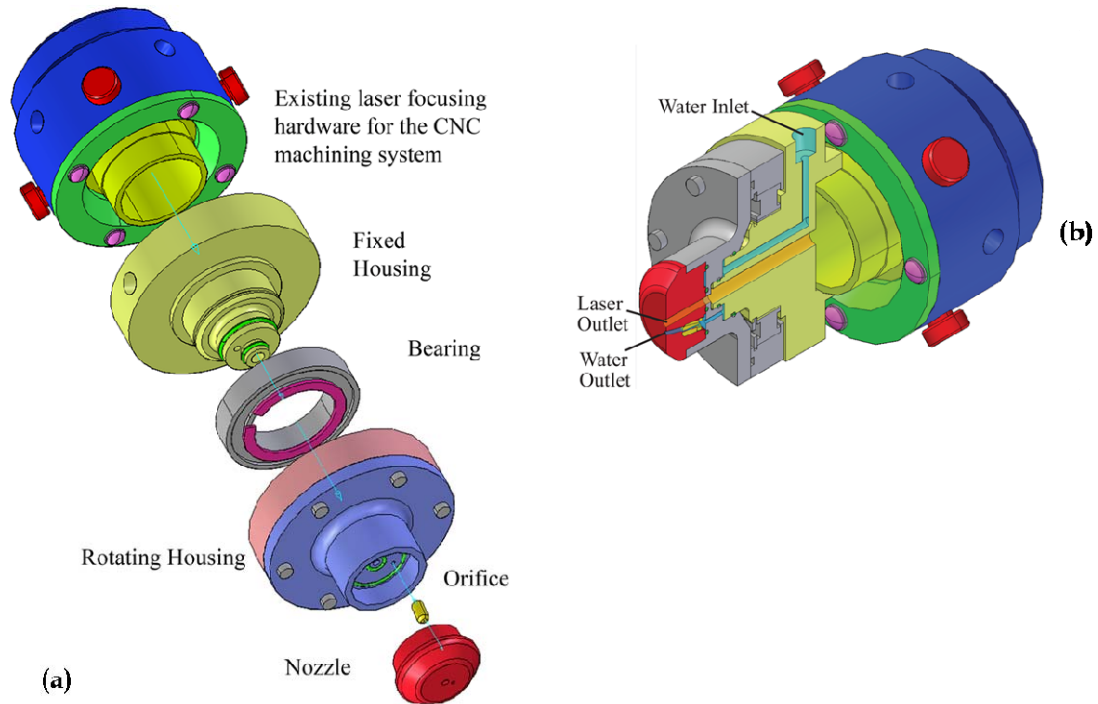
(a) Exploded view of Laser/Waterjet head (b) Cut section of the head
